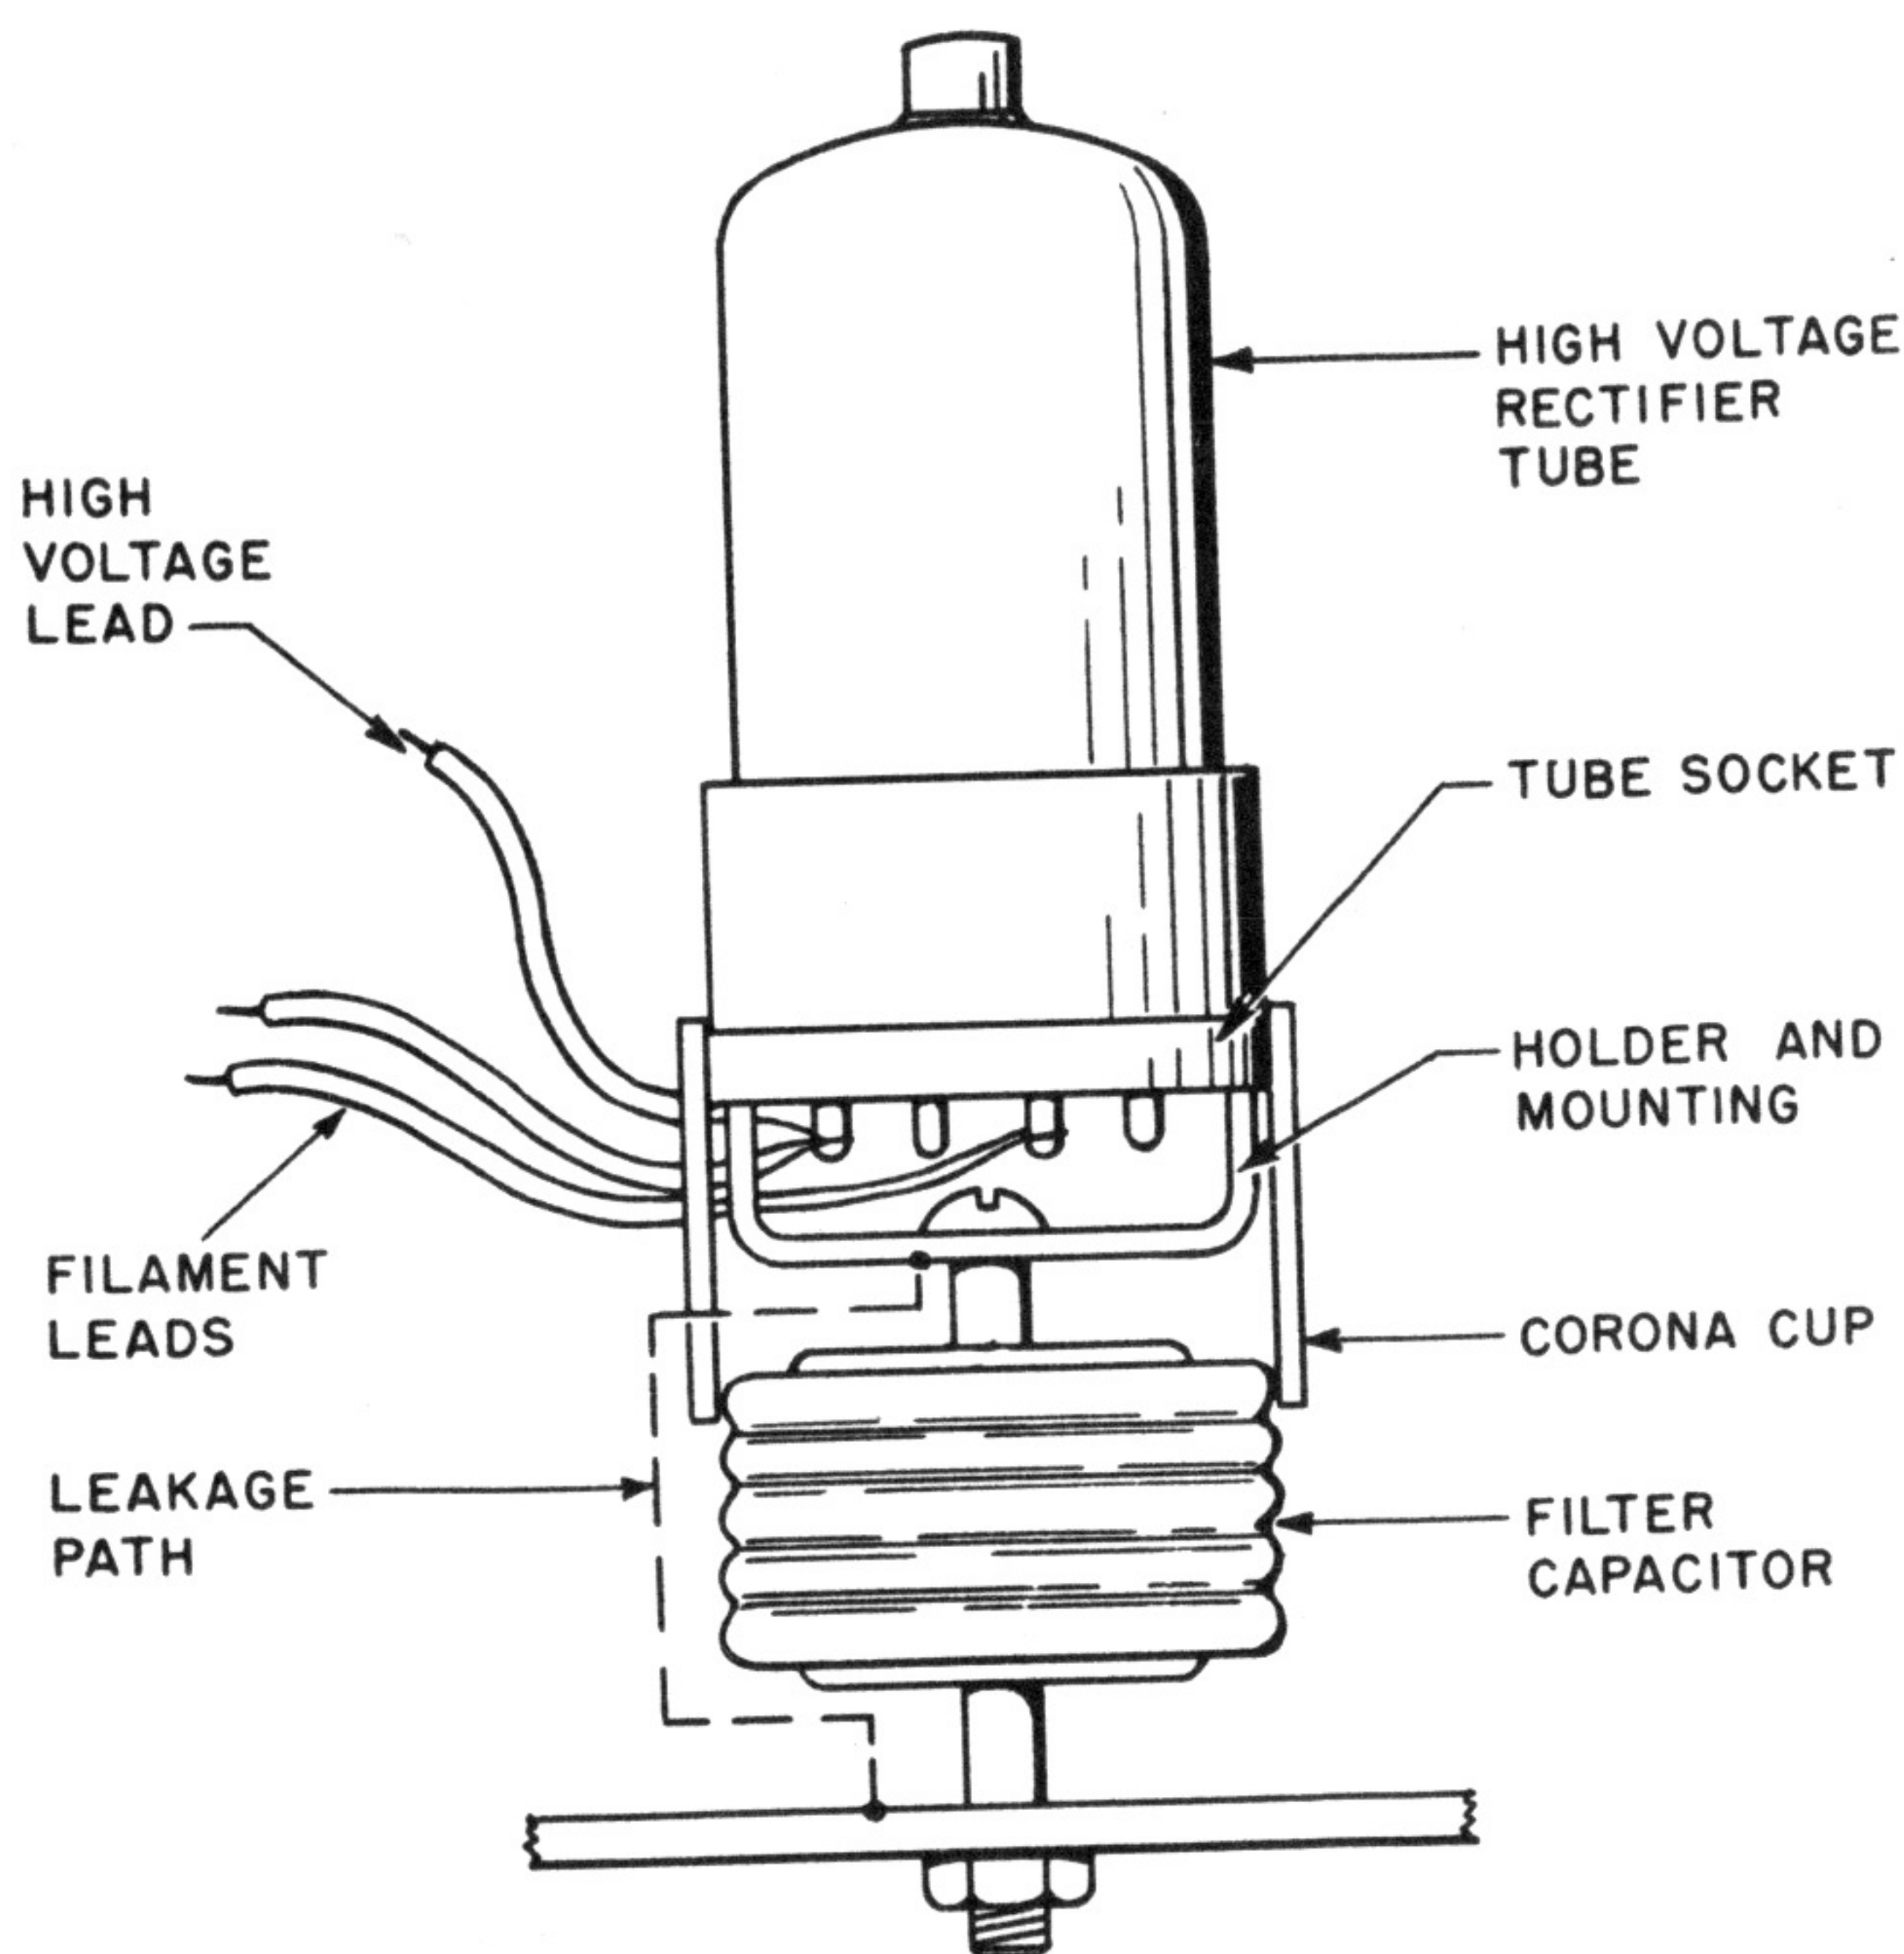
High-voltage rectifier tube and filter capacitor assembly.
